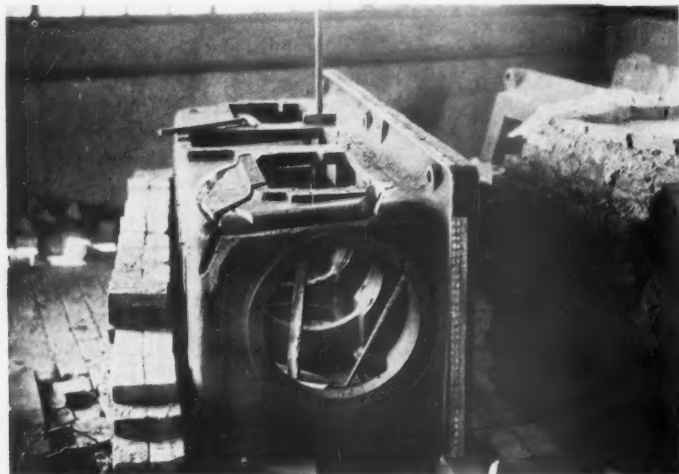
Cast welding of broken steam cylinder, wrecked when valve gear gave way during runaway
